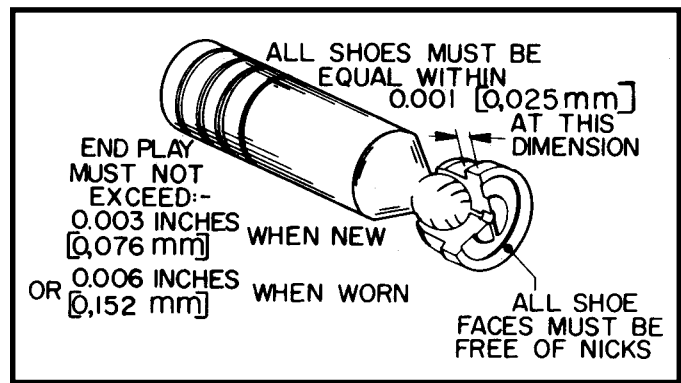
PISTON and SHOE INSPECTION (5V-12021-L).
